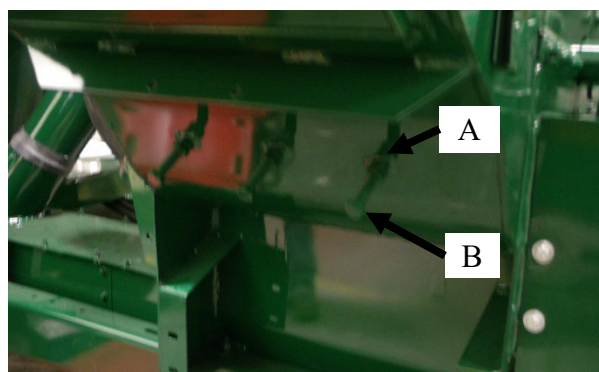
Hay Retard Bolts (A - Lock Nut; B - Adjustable Retard Bolt, 20 Inch Hammer mill Shown).
